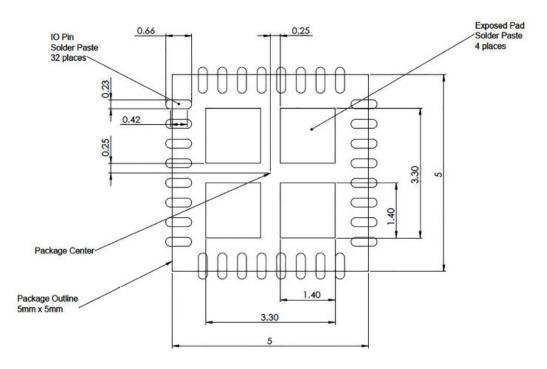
• PD69200 Top Layer Solder Paste and Vias PCB Layout for Thermal Pad Array
